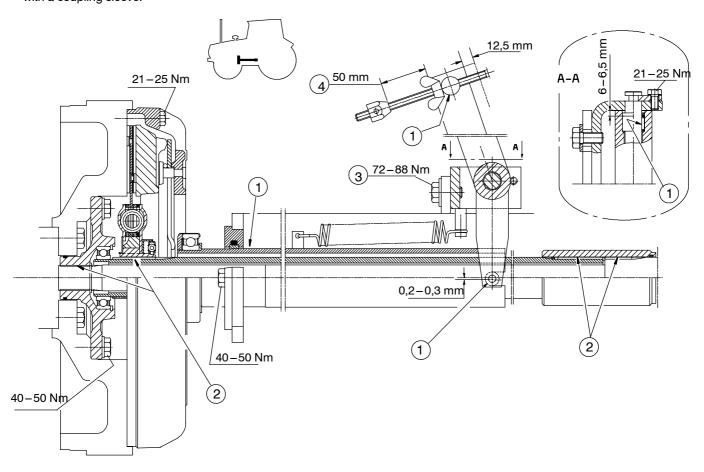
Clutch with release mechanism up to ser. no. 659477.
